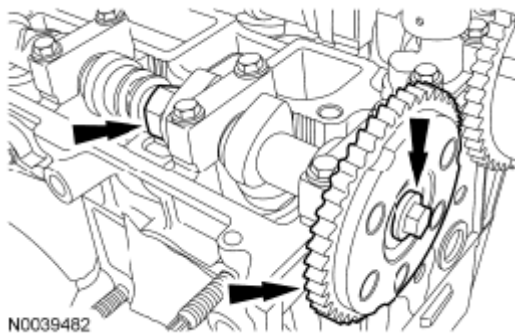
Locating Flats On Camshaft, Bolt & Exhaust Camshaft Sprocket
